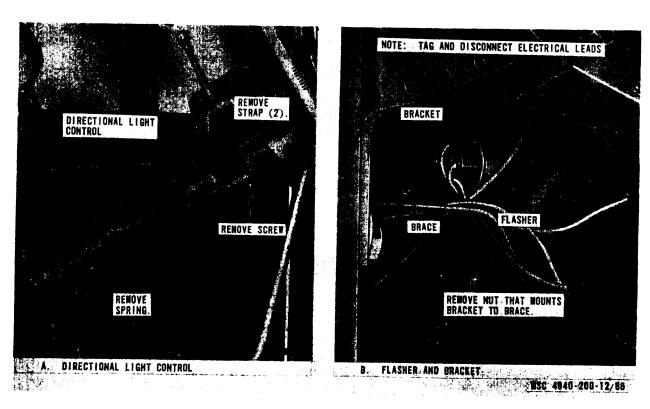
Directional light control and flasher, Model CMU-5, removal and installation.
